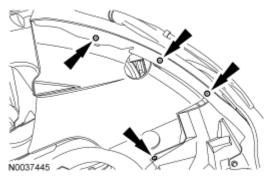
Locating RH Fender Splash Shield Screws Courtesy of FORD MOTOR CO.
